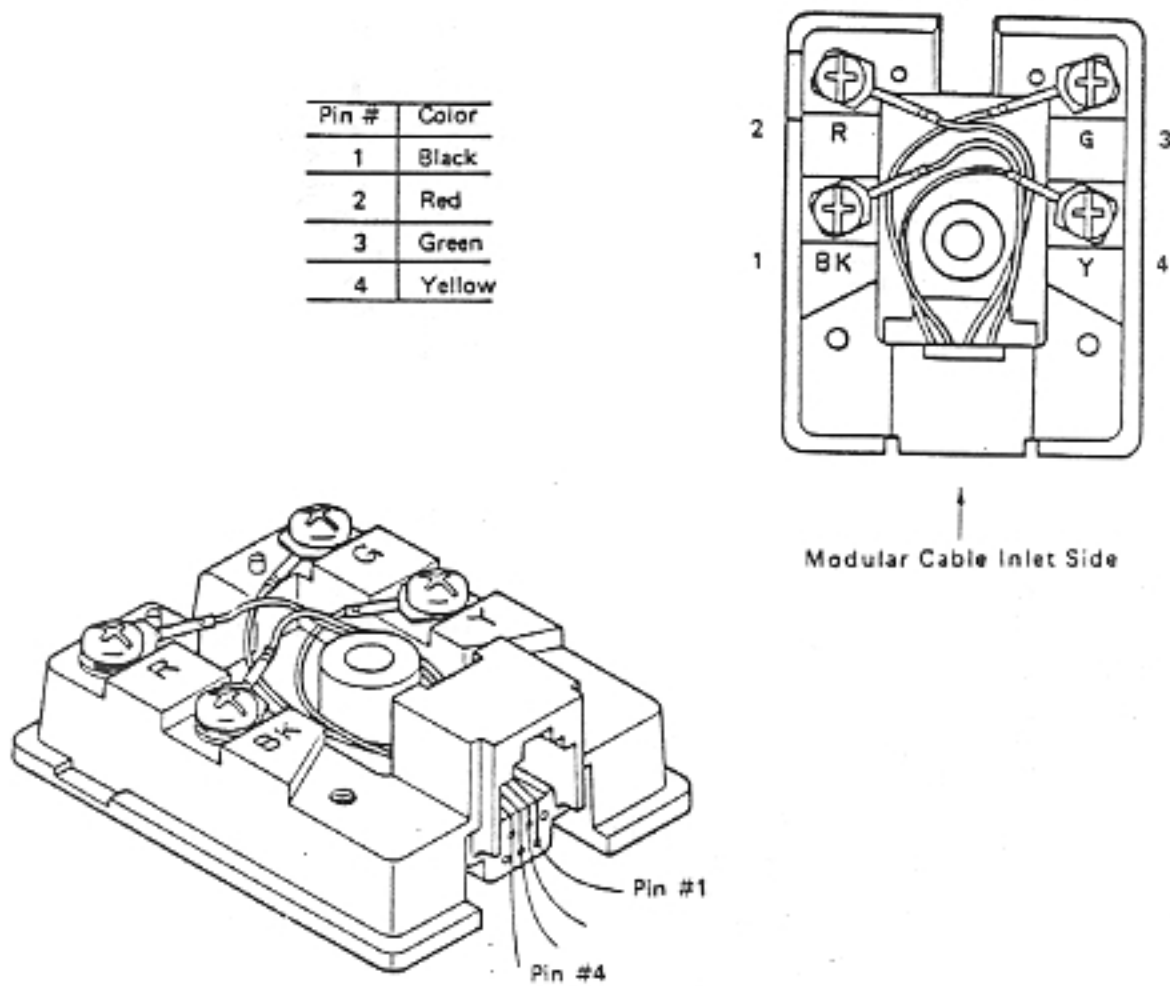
B Six-Position, Four-Conductor Wall Jack Construction
